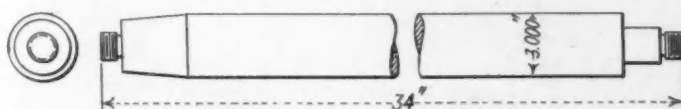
A GEAR-GRINDING MACHINE SPINDLE THAT IS GROUND BEFORE BEING USED
